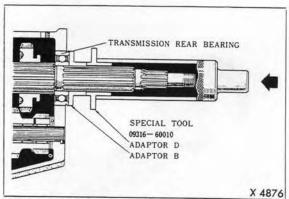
Installing the transmission rear bearing on the spline shaft with special tool.
